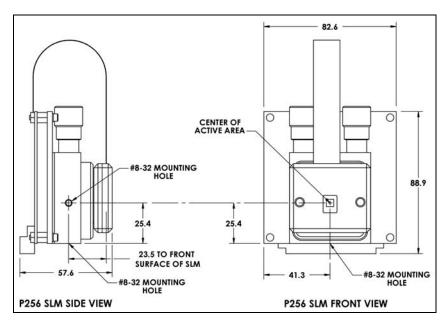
~ Outline drawing showing front and side views of 256 SLM Optical Head.
